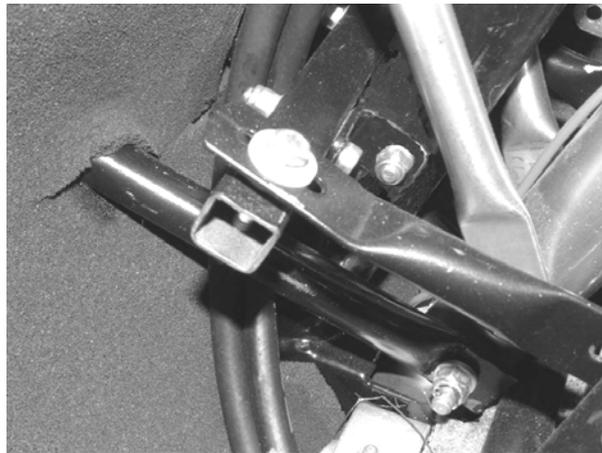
; nose wheel steering bar, with rubber grommets between pushrods and box section.
